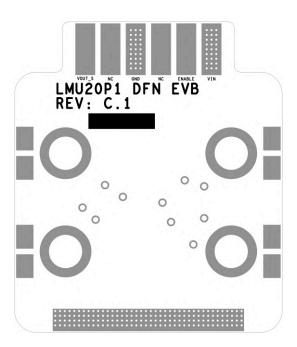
LMU20P1-EVB bottom layer assembly (mirrored)
